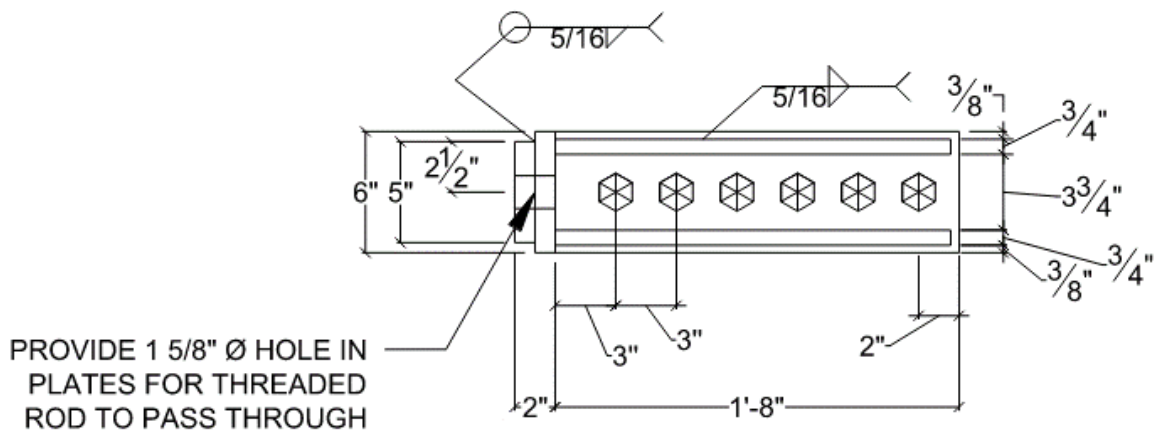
Close-Up Plan View of Steel Bracket Assembly.
